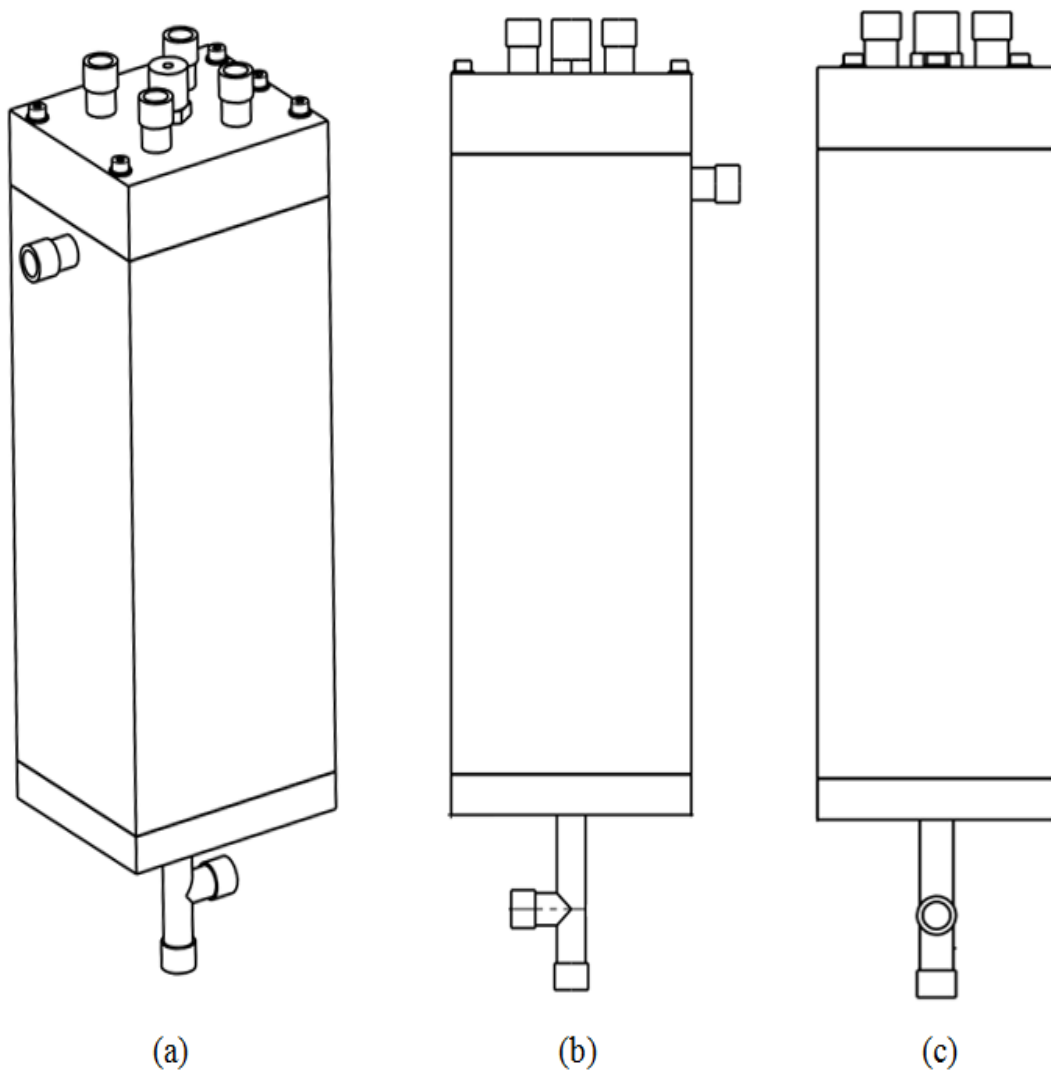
The sketch of rectangular column (a) isometric view, (b) front view and (c) side view.
